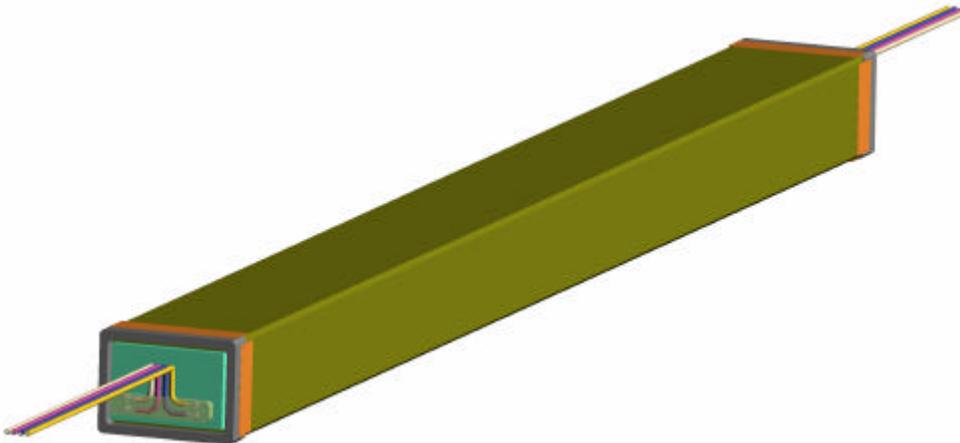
Crystal Detector Element assembly. Note that the CDE is depicted with its “top” surface – with the seam-sealing tape – down. The seal tape is therefore not shown. The CDE assembly drawing is LAT-DS-1900.
